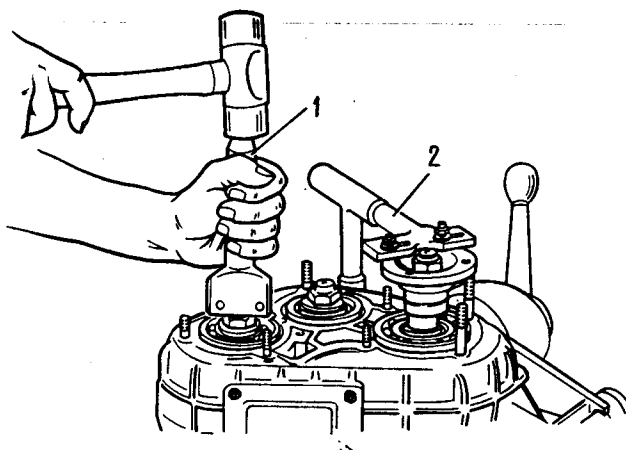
Upsetting Rear Axle Drive Shaft Flange Nut:
